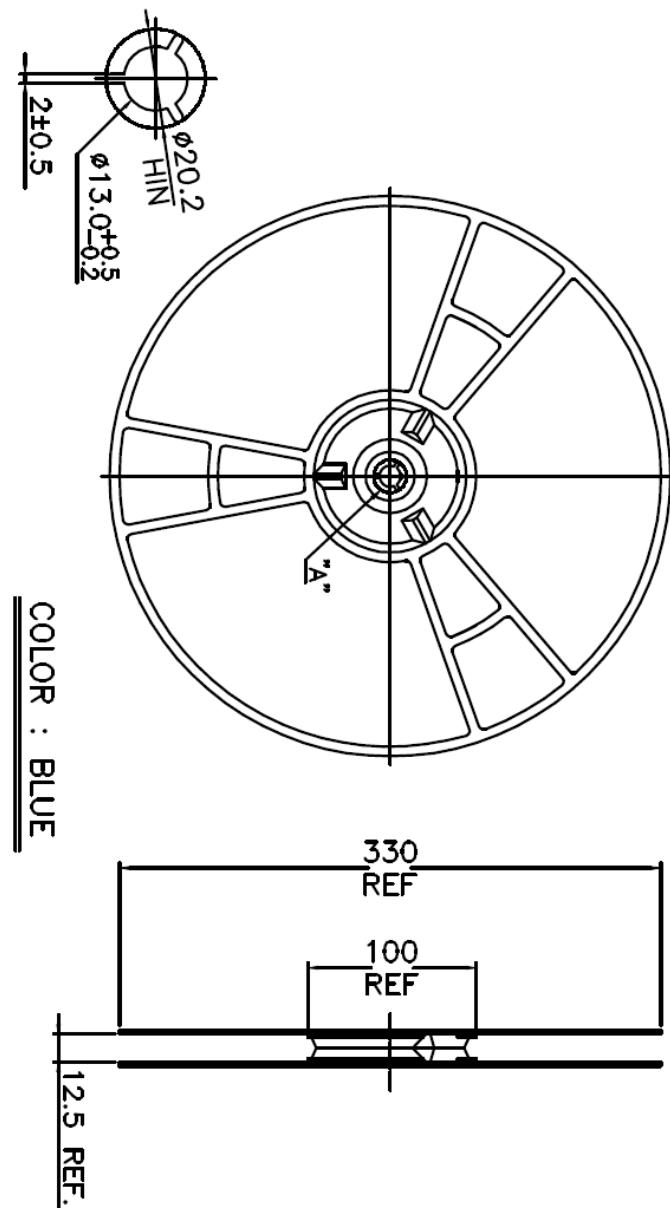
FT232BQ and FT245BQ Reel Dimensions
